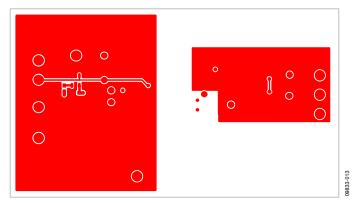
EVAL-ADM3053EBZ Evaluation Board Solder Side
